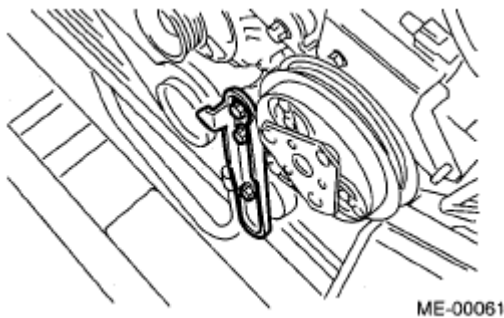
Identifying Rear Side Belt And Belt Tensioner
